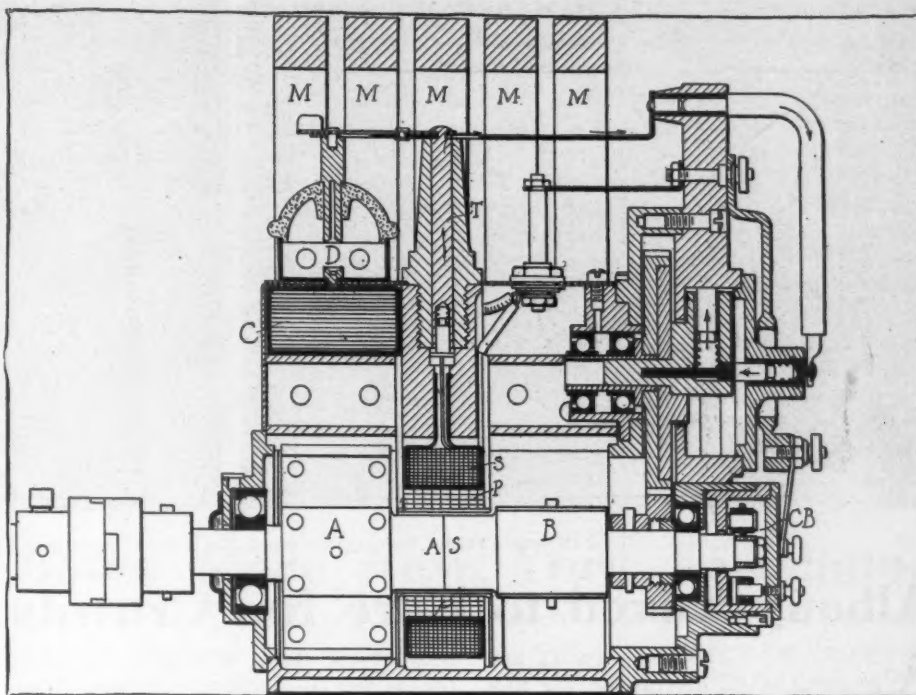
SIDE VIEW OF K-W MAGNETO IN SECTION SHOWING CONSTRUCTIONAL DETAILS
